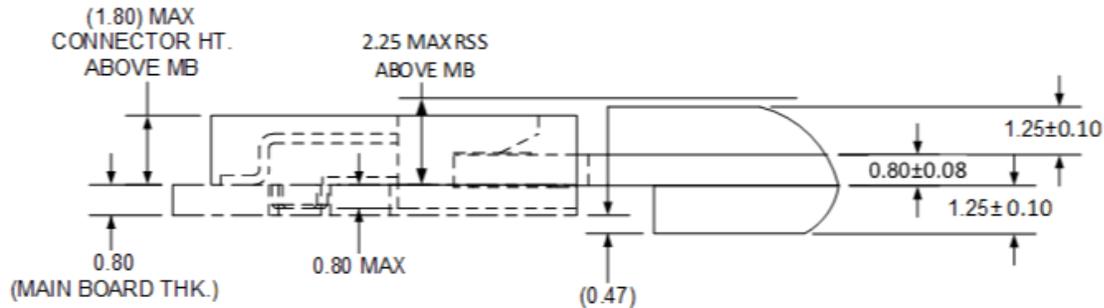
Stack-up Mid-mount (In-line) Double-sided (D2) Add-in Card for 1.35 Maximum Top-side Component Height
